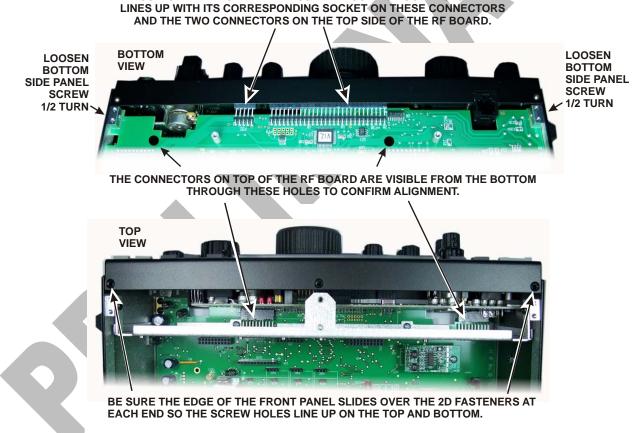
Mounting the Front Panel Assembly on the Chassis.
